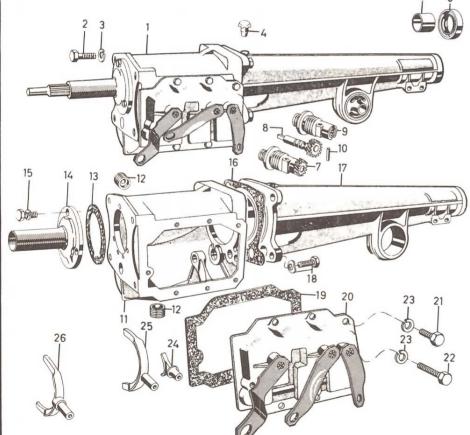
Exploded view of the four-speed gearbox (transmission) with selector nechanism.
